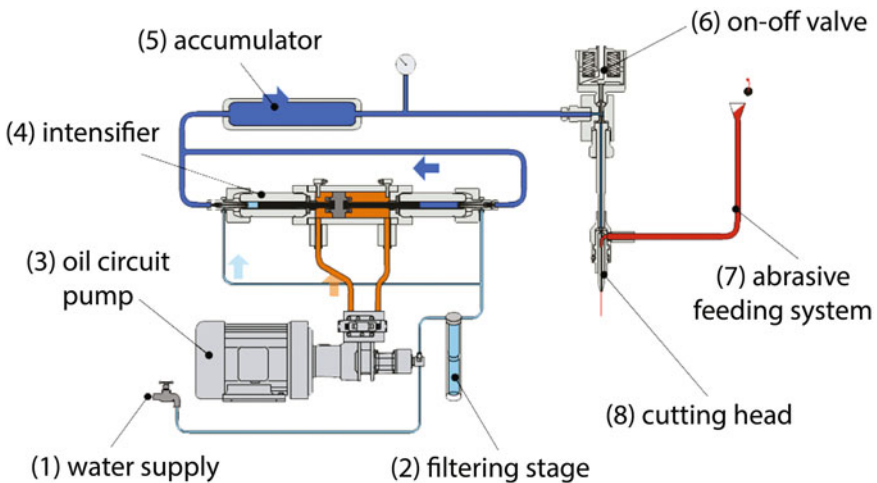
Waterjet machining system general layout (courtesy of Ingersoll-Rand)
